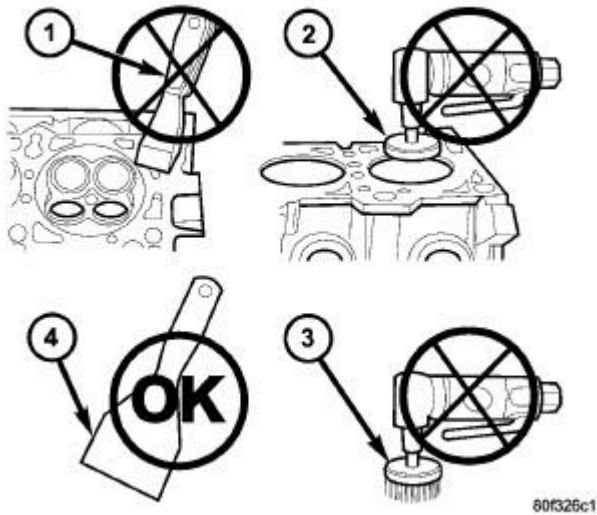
PROPER TOOL USAGE FOR SURFACE PREPARATION
